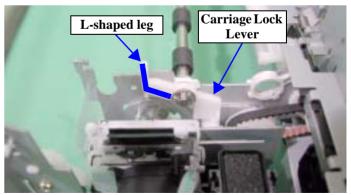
Orientation of Mounting the Carriage Lock Lever
